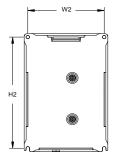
Wall installation diagram of VFDs of 575V 0.75–18.5kW
